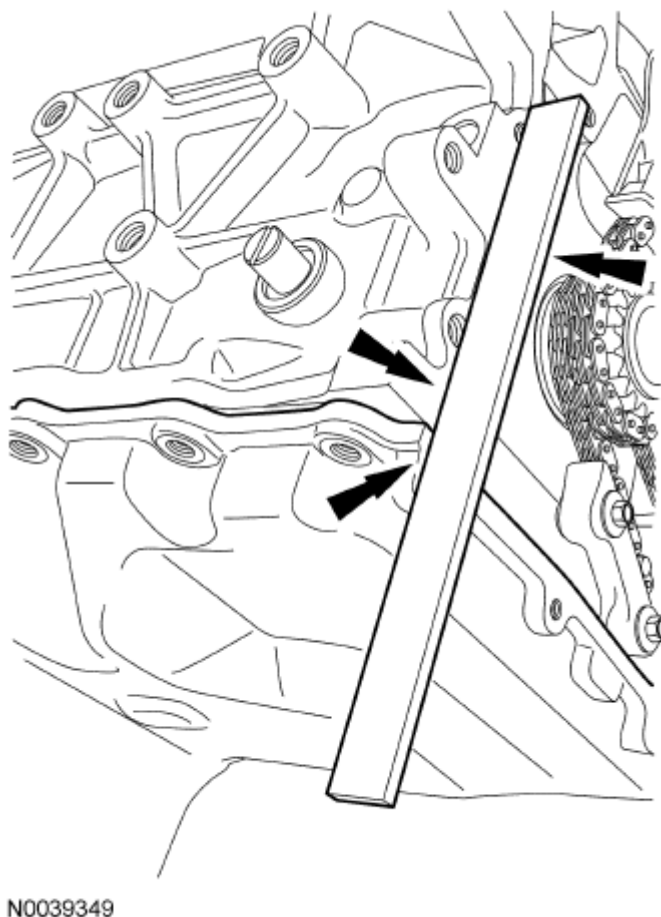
Aligning Front Surface Of Oil Pan Flush With Front Surface Of Engine Block
